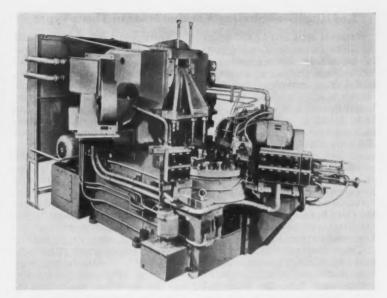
Vertical hydraulic machine for assembling bushings in connecting-rods and drilling the rods, brought out by the American Broach & Machine Co.
